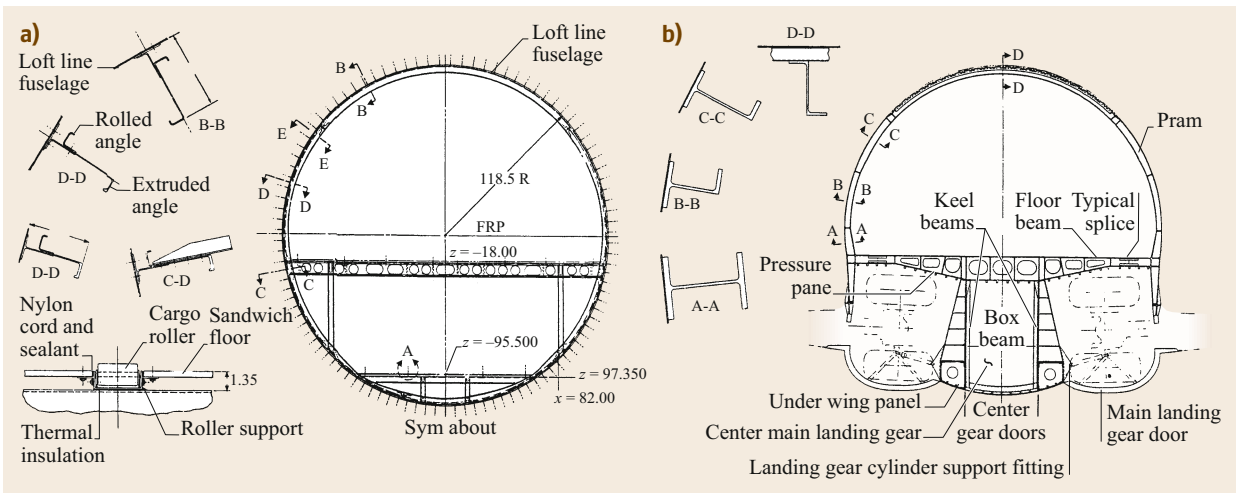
,b Fuselage structural elements: (a) Typical fuselage cross section; (b) section through wheel wall
